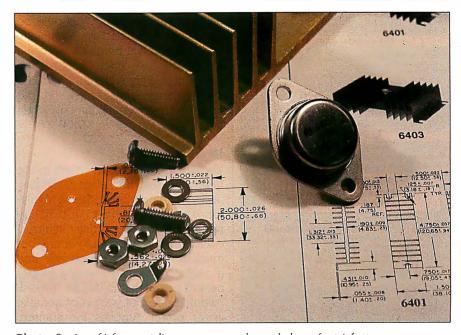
Any high-current linear power supply needs large heatsinks to carry away the heat dissipated in the regulators. When more than one regulator is to be mounted on the same heatsink, special insulated mounting kits must be used.
